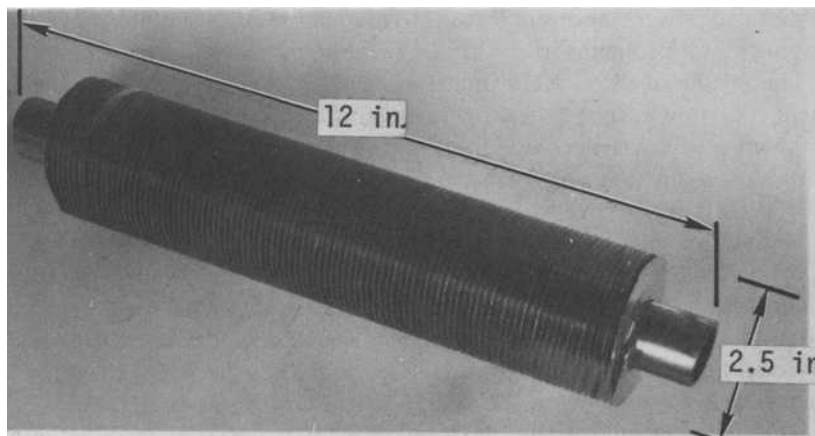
Tube specimen (aluminum fins, steel tube) similar to specimens installed at two Gulf Coast gas compressor stations (1 in. = 2.54 cm).
